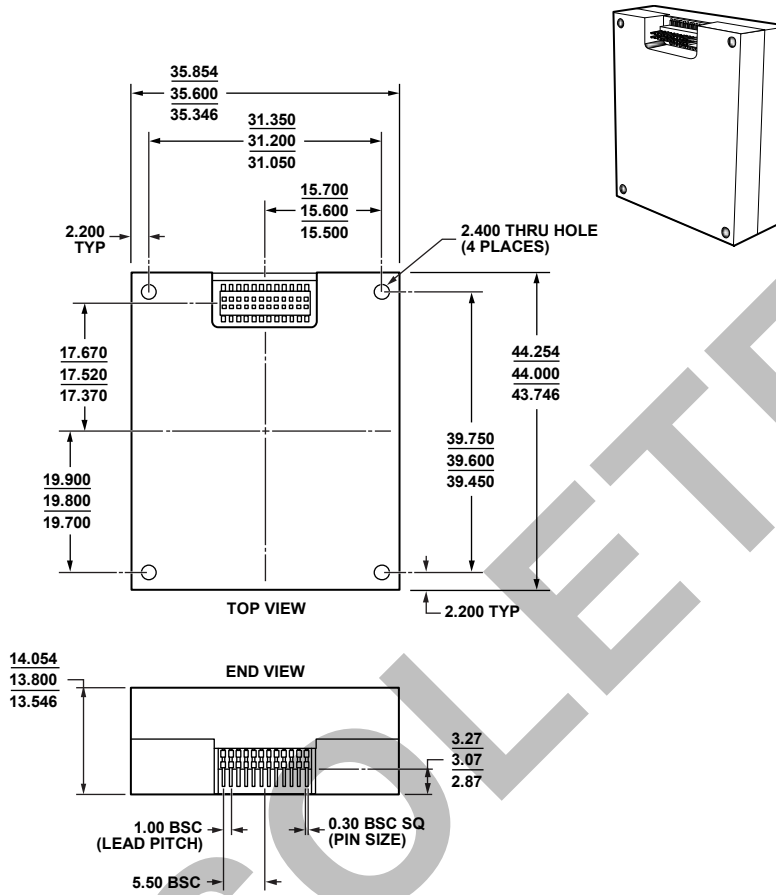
PCB Module with Connector Interface (ML-24-3)
